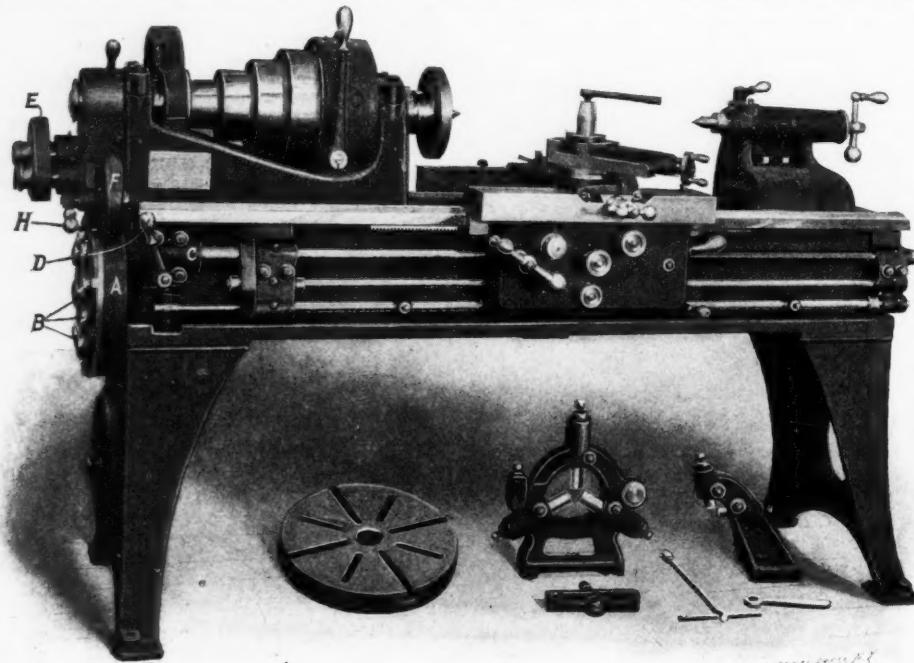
New Engine Lathe of the Springfield Machine Tool Co.
